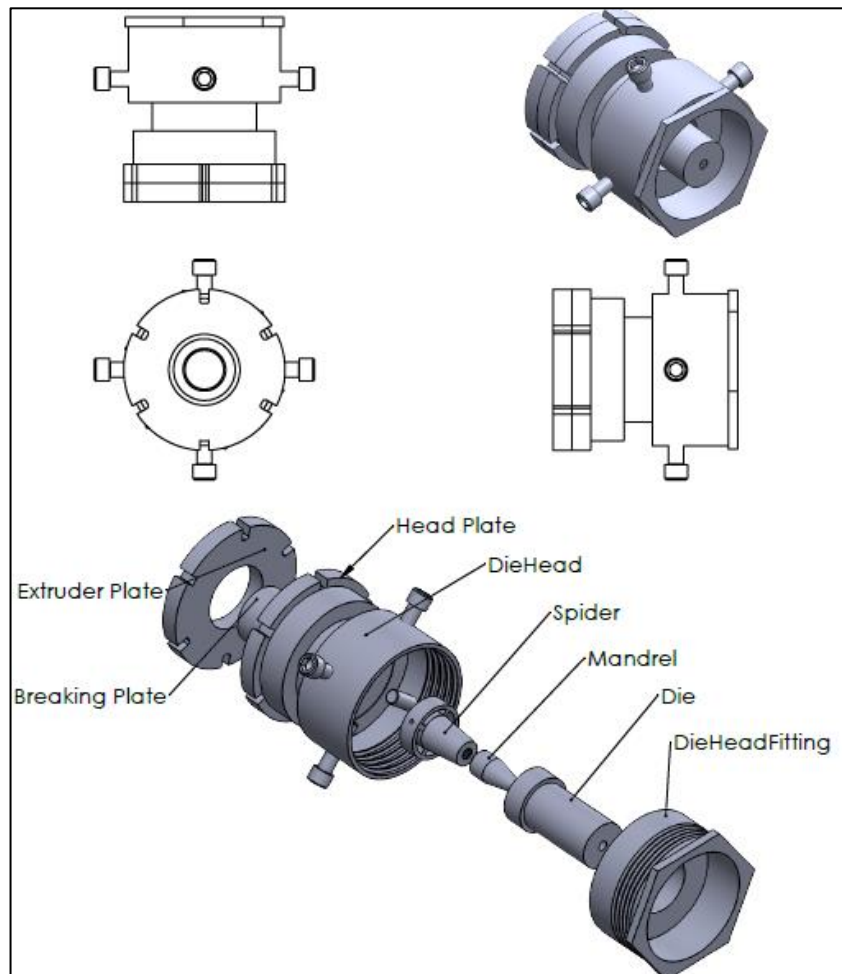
Extruder mounted Tooling Design (Scale 1:5)
